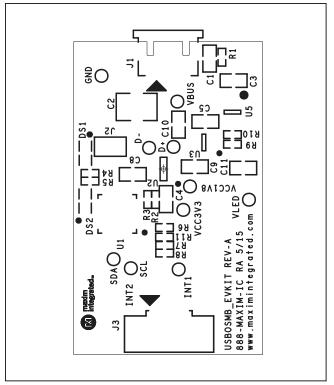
USBOSMB Mother Board Component Placement Guide—Component Side
